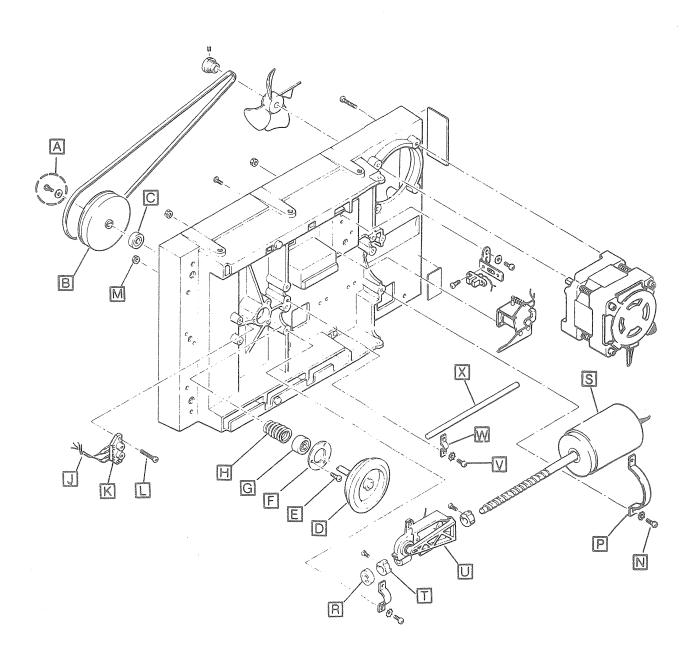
SPINDLE, BEARINGS, DRIVEN PULLEY, INDEX/SECTOR EMITTER,
